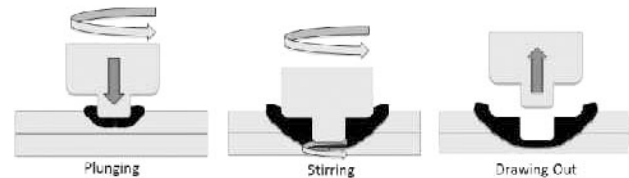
A schematic illustrating the friction stir spot welding process.
